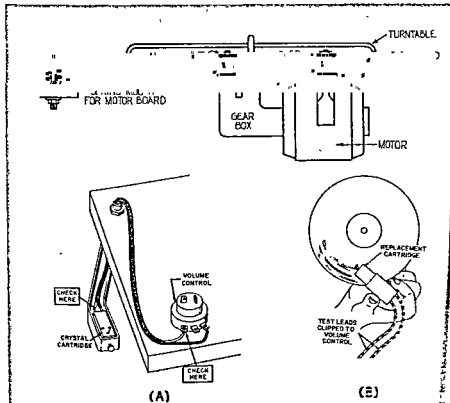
Phonograph-motor board assembly showing rubber suspension mounting for the motor and spring mounting for the motor board.
